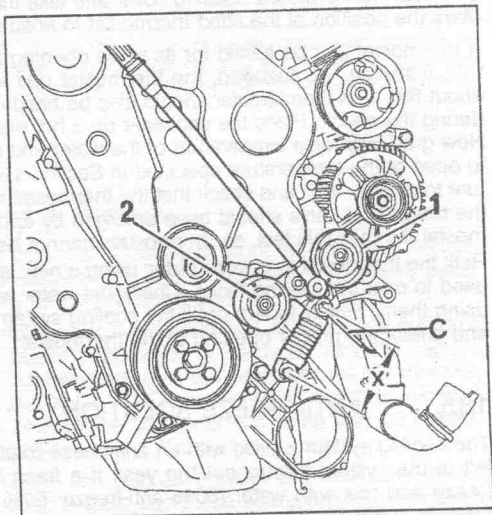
Measure the dimension "X" (bottom right) to check if a drive belt can be re-used. Follow the description in the text.
